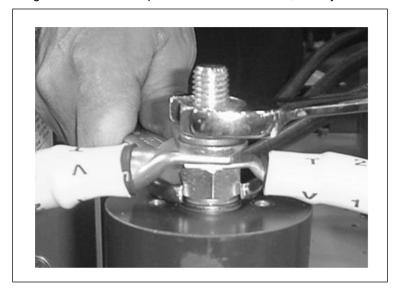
CORRECT CABLE CLAMPING (MULTIPLE CABLES)
